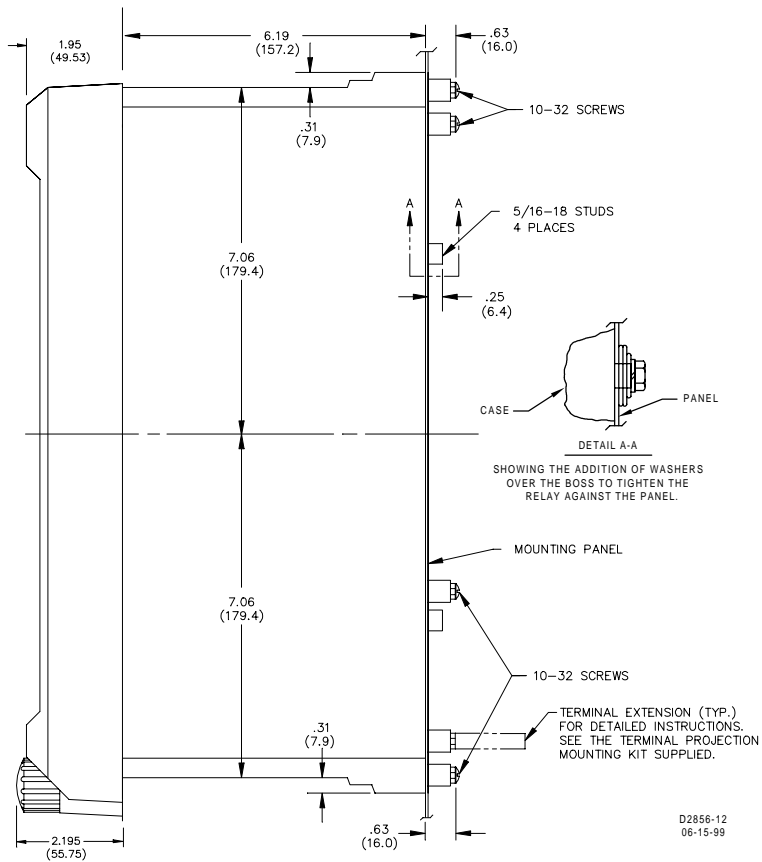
M1 Case, Double-Ended, Projection Mounting, Outline Dimensions, Side View
